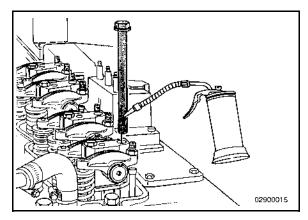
LUBRICATE THE 12 MM THE PEDESTAL/HEAD CAPSCREW BOLT THREADS AND UNDER THE CAPSCREW HEADS
